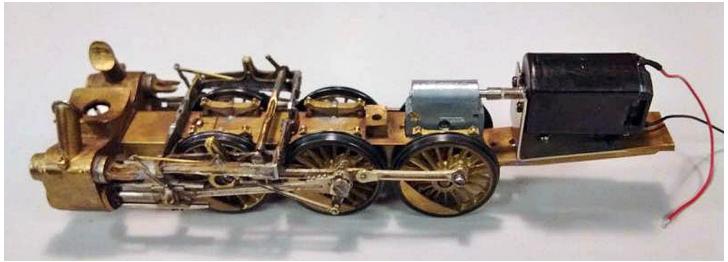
The chassis originally had a bare-naked worm gear on the rear driver axle, intended to mesh with a motor-mounted worm without a gearbox. Friend Gary Jordan, who once was a NWSL shop employee, milled out the frame and installed the gearbox and motor bracket shown here.
